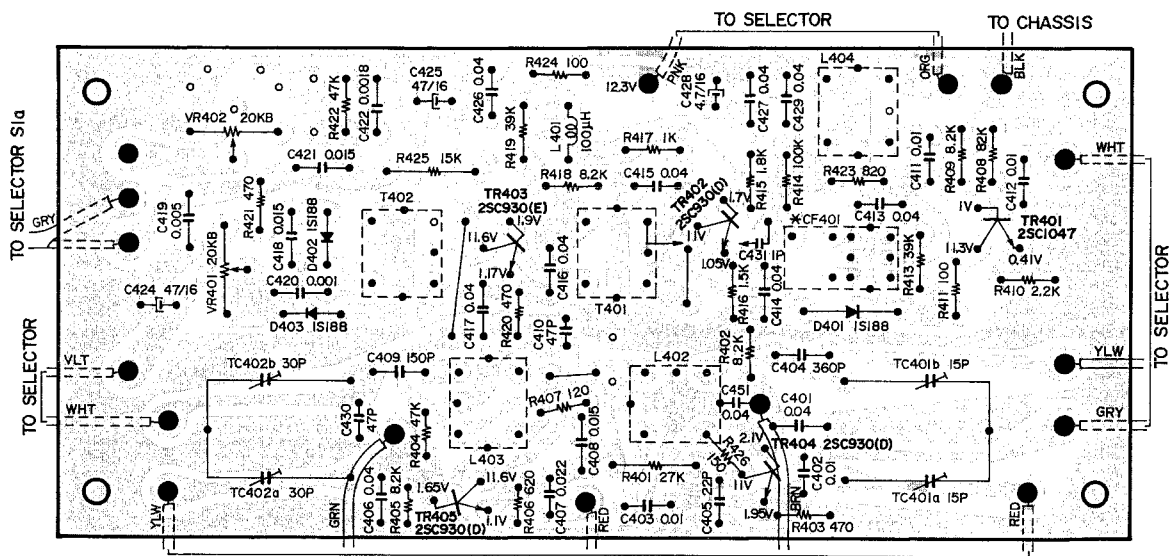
AM IF AMP. P.C. BOARD 4013 (Reverse Side)
